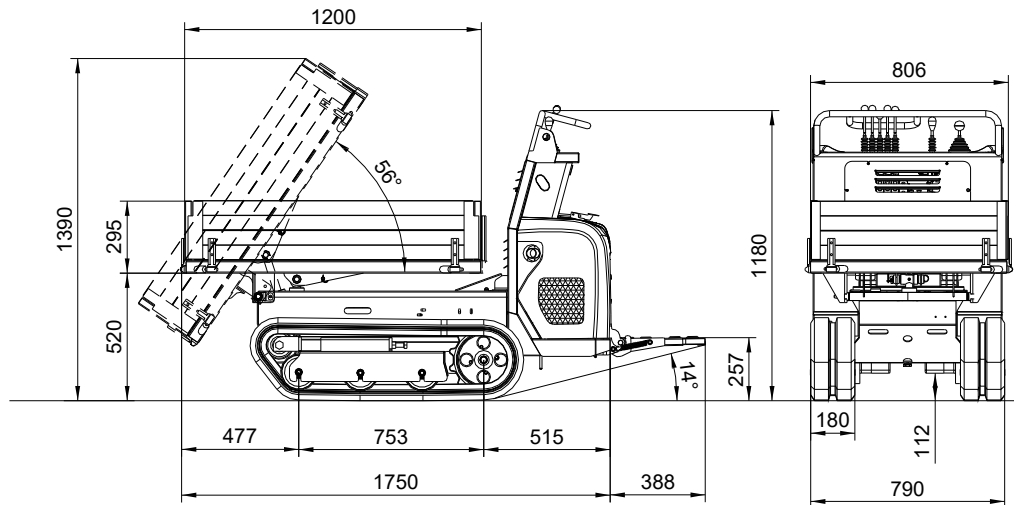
Vehicle dimensions (model DT08-P with front skip)
